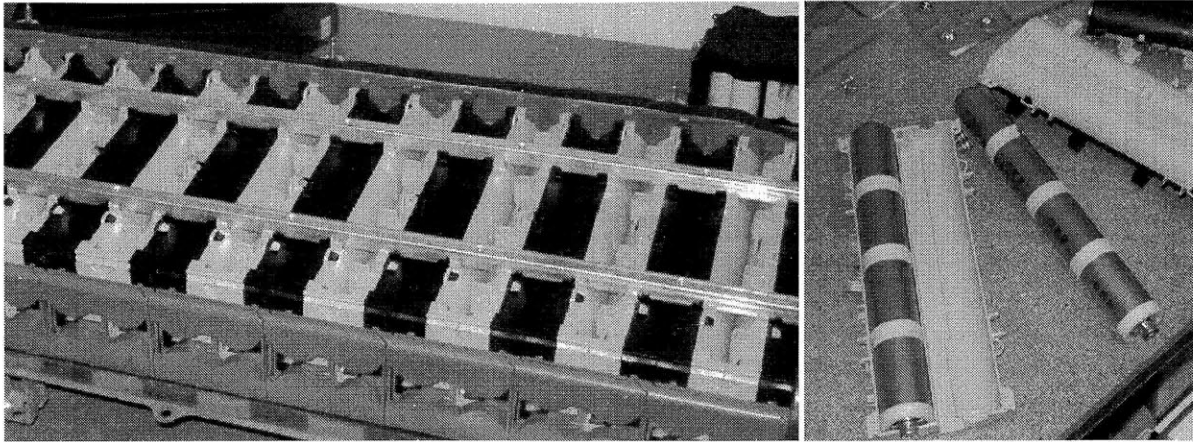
Ford Fusion Hybrid battery pack module stack (left), disassembled module (right)
